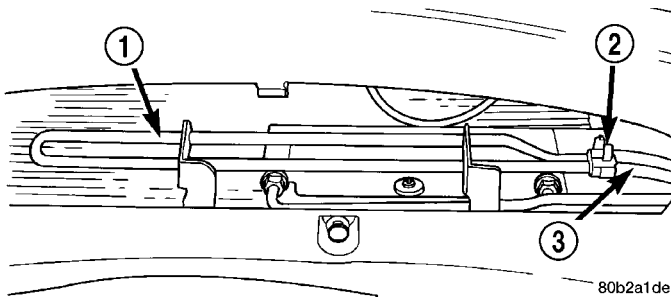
Lower Hose At Power Steering Fluid Cooler
